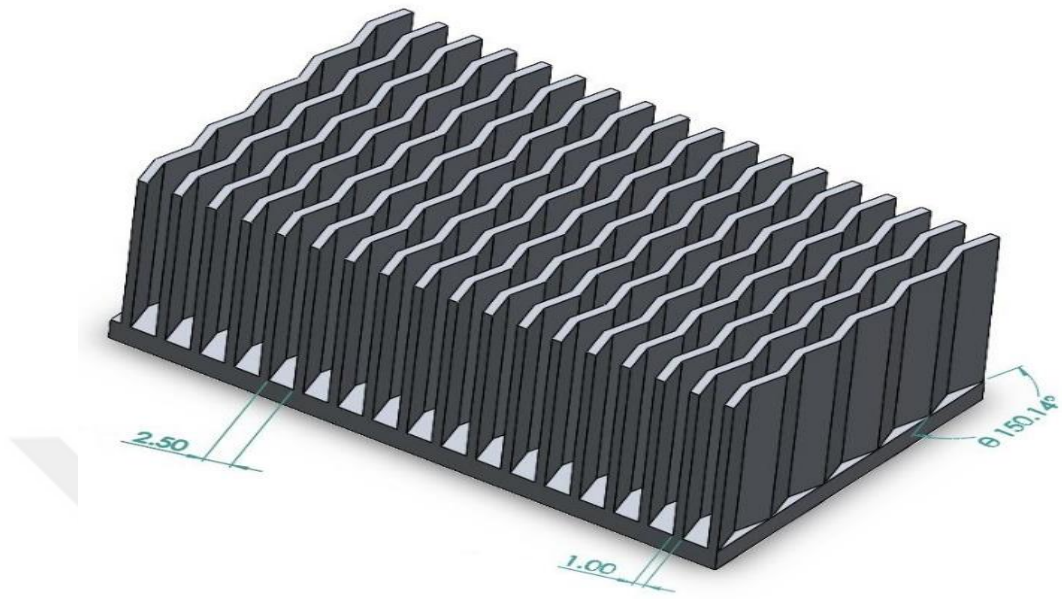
The CAD design of continuous zigzag fins heat sink
